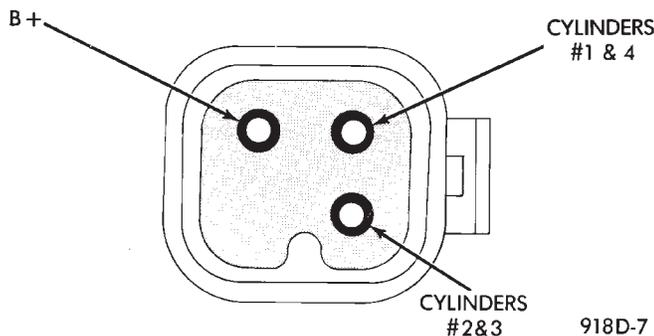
Wiring Harness Coil Connector—Turbo III Engine
